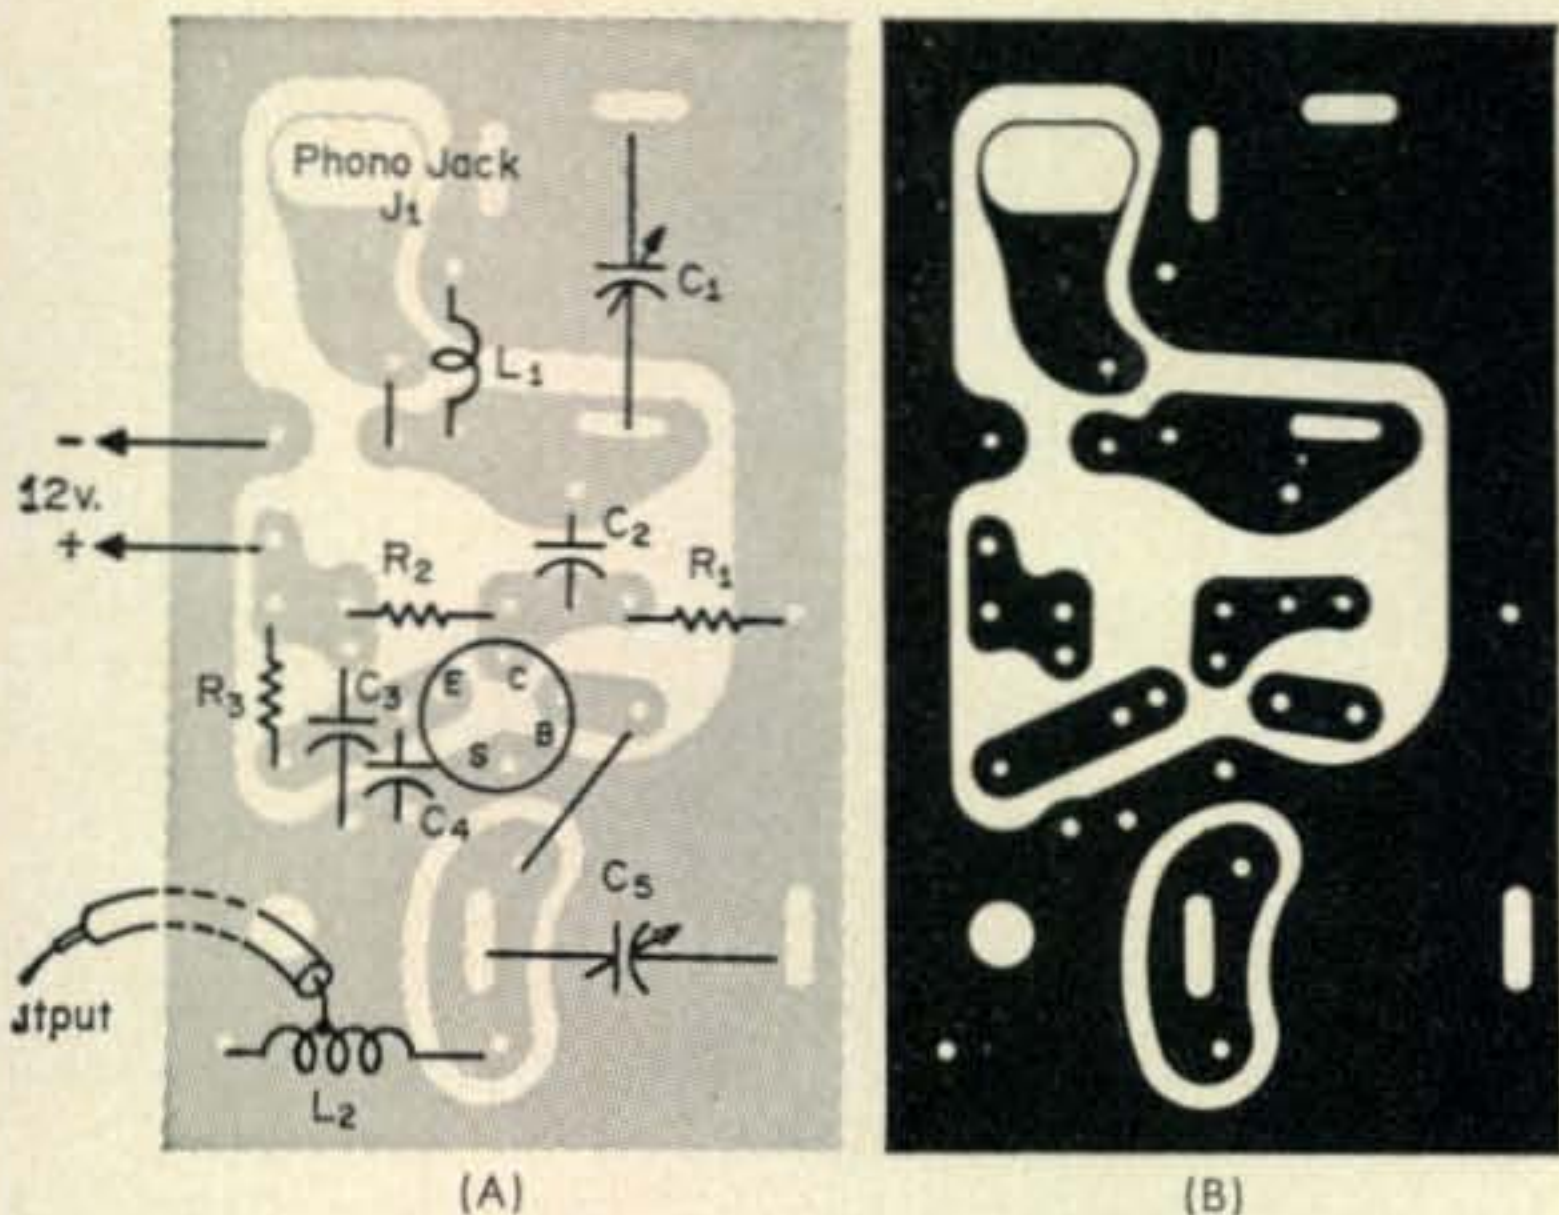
(A) Layout of parts shown on the foil side of printed circuit board. Components are inserted from opposite side. (B) Full size layout of circuit board, foil side. Drill lead holes at all white dots. Cut slots as shown for C_1 and C_5 lugs, and J_1 ground lug. Large holes are for J_1 (top oval) and output coax (bottom round.)
